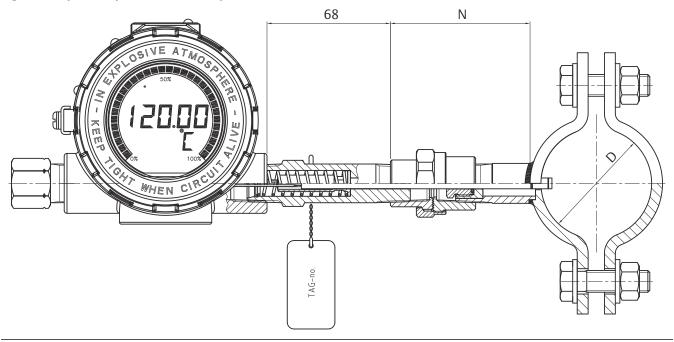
Pipe Clamp Sensor Assembly with Rosemount 3144P
